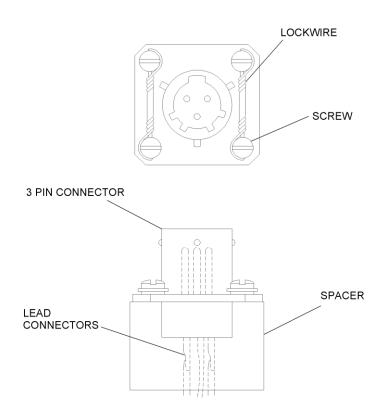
Remove Connector and Spacer from Stator and Housing Assembly
